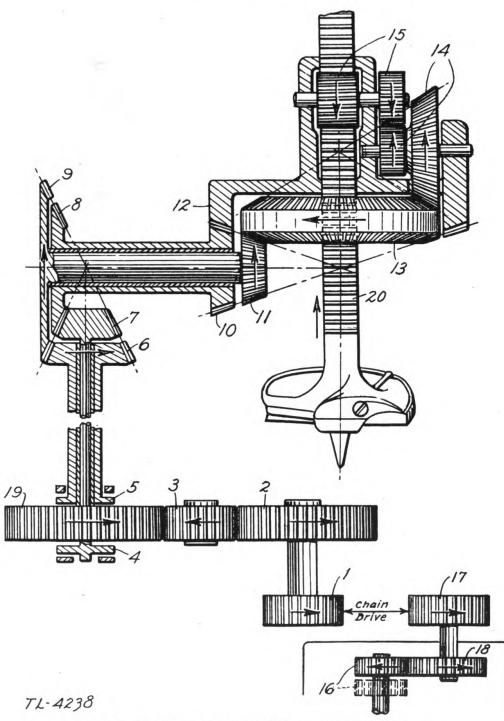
Earth borer equipment HD, gear trains, raising auger.
